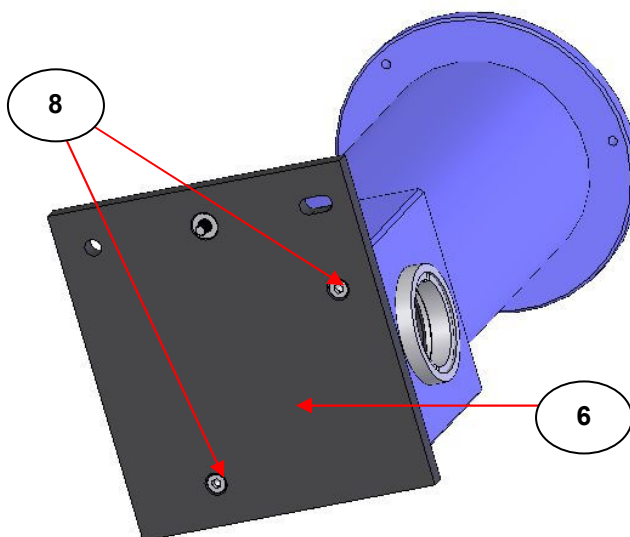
Underside View of GS21525 Vacuum Jacket Showing Benchmark™ Adapter Plate Fixing Screws.
